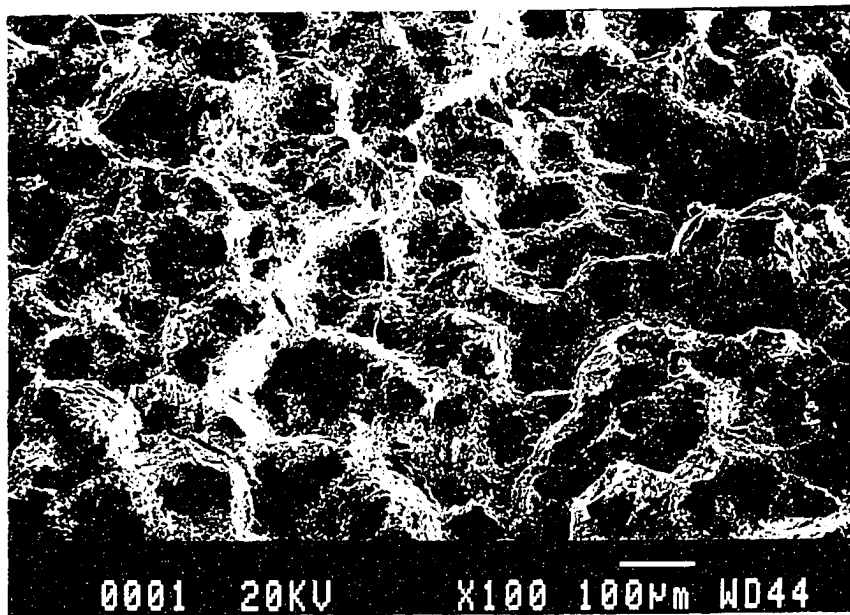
Fracture surface produced in a Sn modified sample (16h sinter) when hot swaged.
